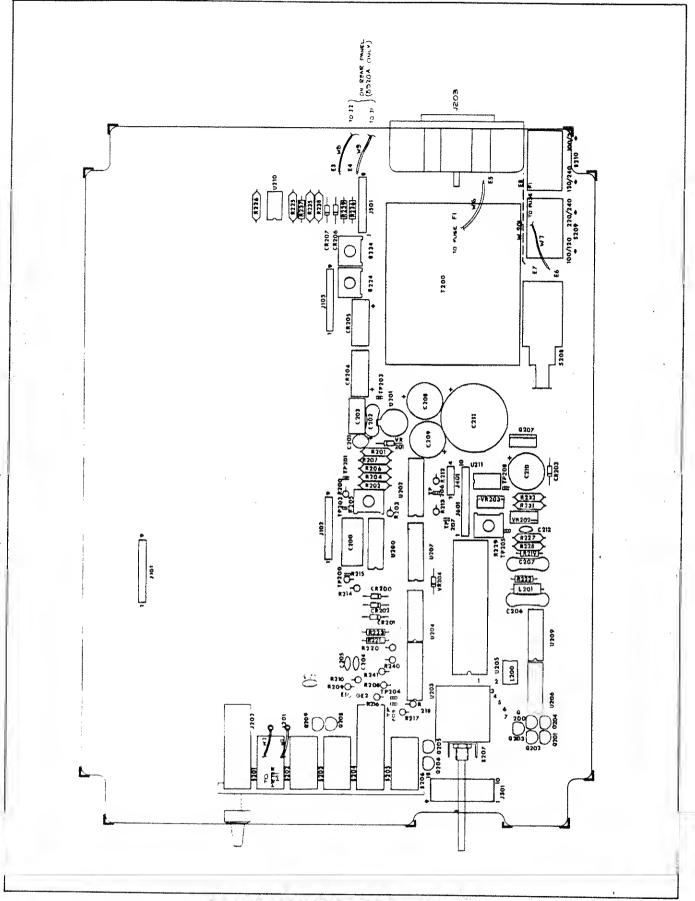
A1 8920A Main PCB Assembly (cont)
